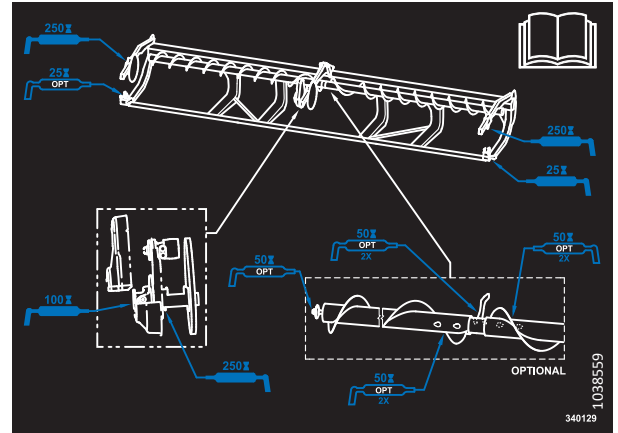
Decal for Double-Knife Header with Two-Piece Upper Cross Auger
